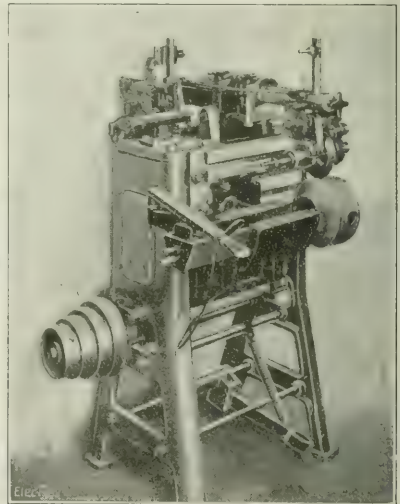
A NEW M.P. SEAM WELDER.
